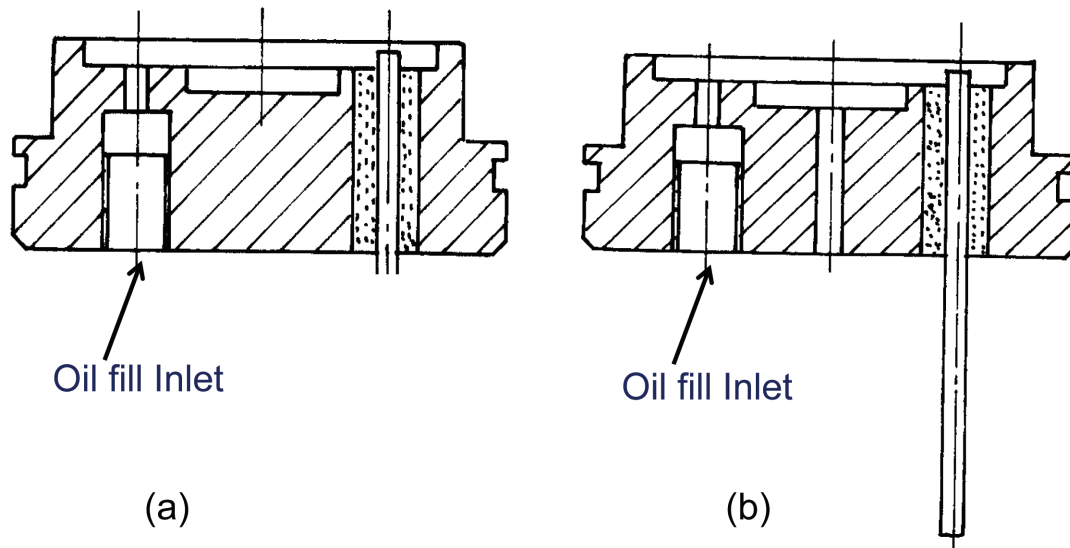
Header Assembly with provision for oil filling for (a) Absolute Pressure sensor (b) Gauge/Relative Pressure Sensor
